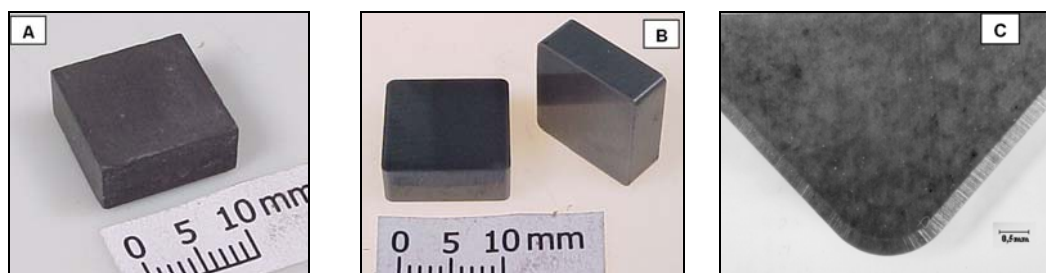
Aspects of molded Si_3N_4 cutting tool and its respective shaving incidence and exit surfaces, before machining tests: (a) produced tool cutting bit, (b) molded tool cutting bit and (c) Cutting tool bit with surface finish.
